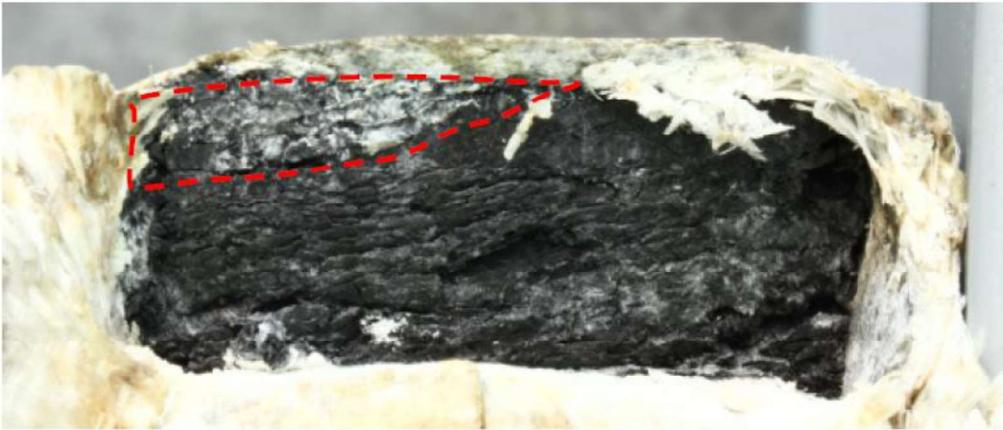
Marked failure area at the fracture point of the upper spar flange
